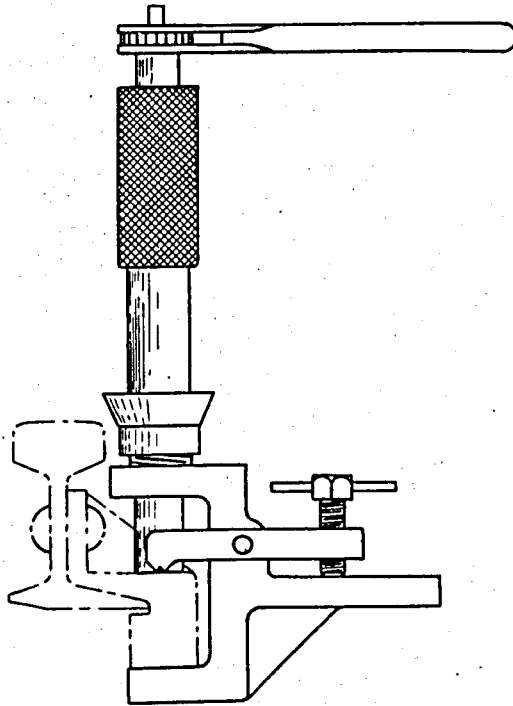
PILOTED REAMERING TOOL AND JIG FOR SPREADER BRACKETS.
